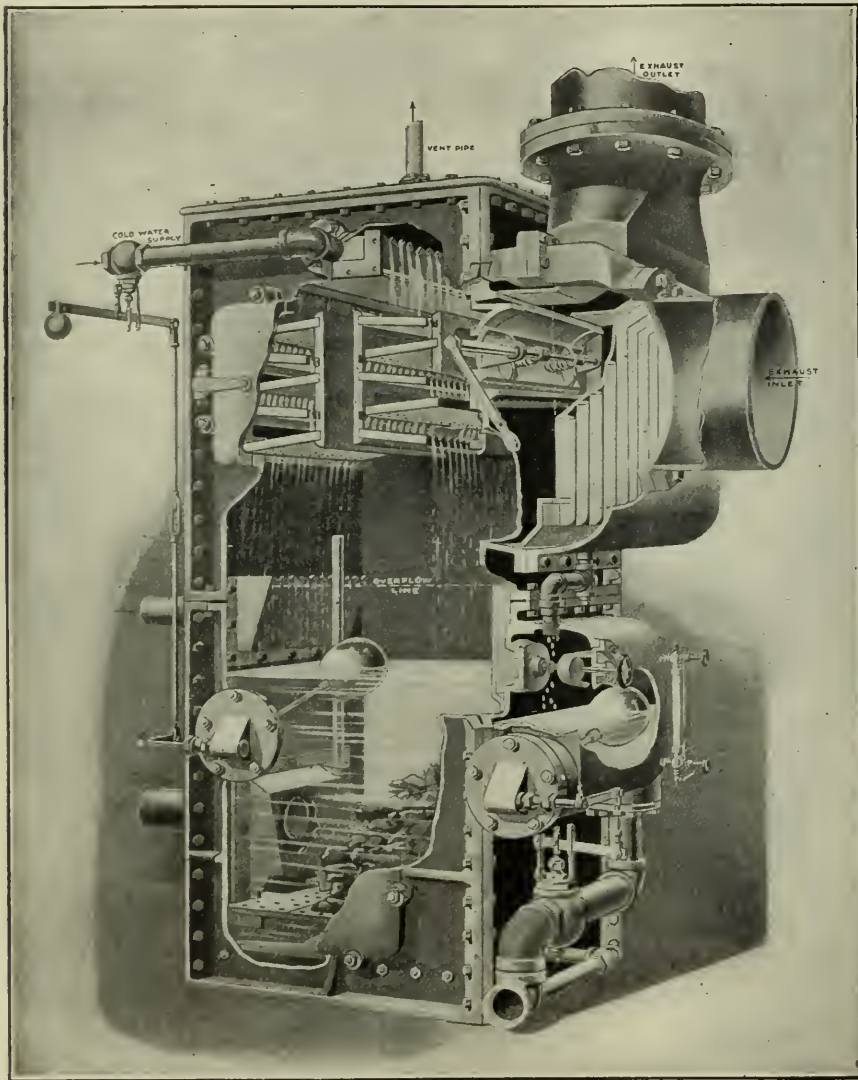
SECTIONAL VIEW OF THE HARRISON SAFETY BOILER WORKS STEAM STACK OPEN HEATER
